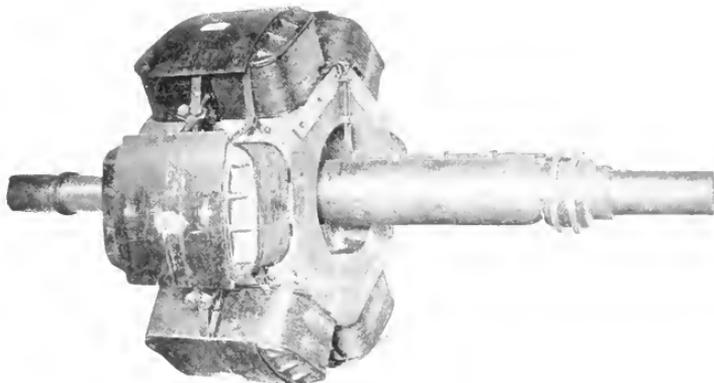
Rotor of a 6-pole, 3530-kv-a., 500-r.p.m. Waterwheel Driven Alternator
